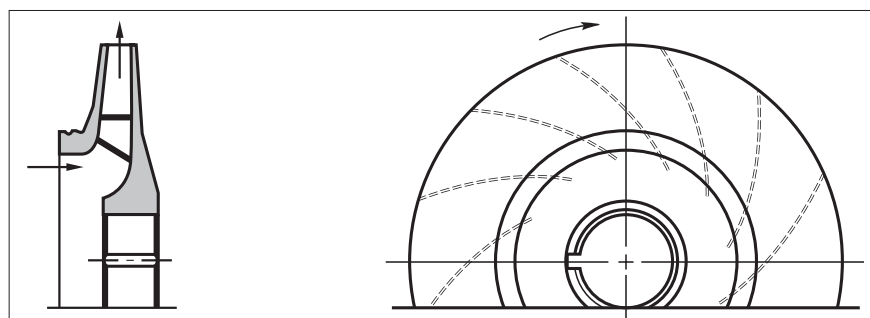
Gas movement in a centrifugal compressor impeller.
